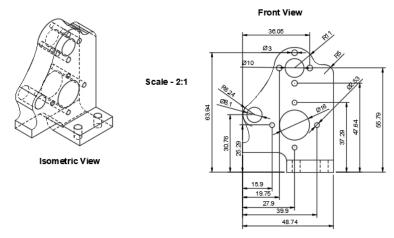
Mounting bracket used to affix Y-axis rail to X-axis carriage.
